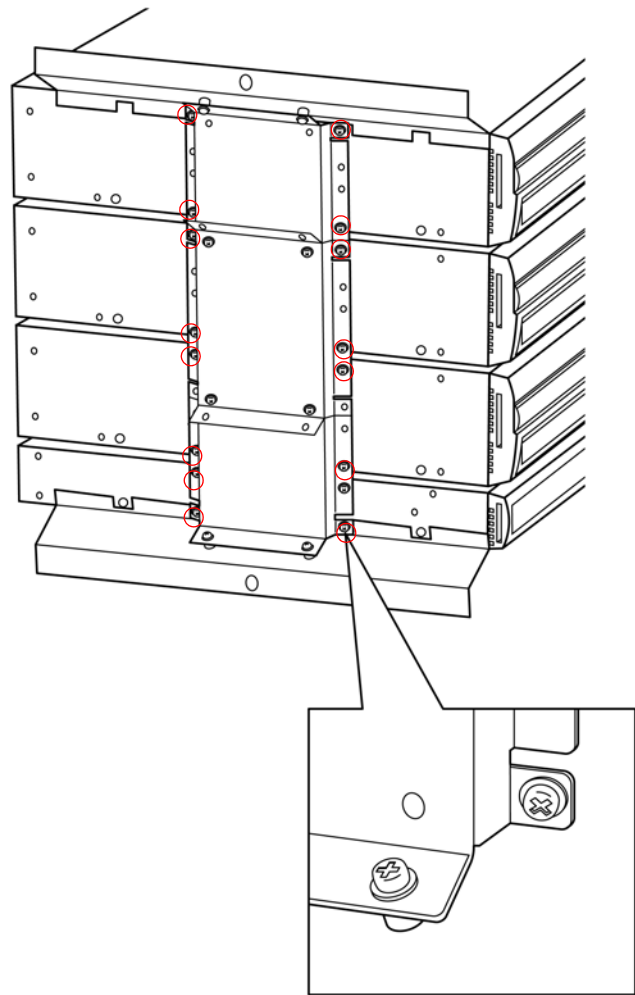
Attach Stand Mount Brackets to Chassis with Screws (CHS1U-AU+CHS2U-AUx3 Configuration)
